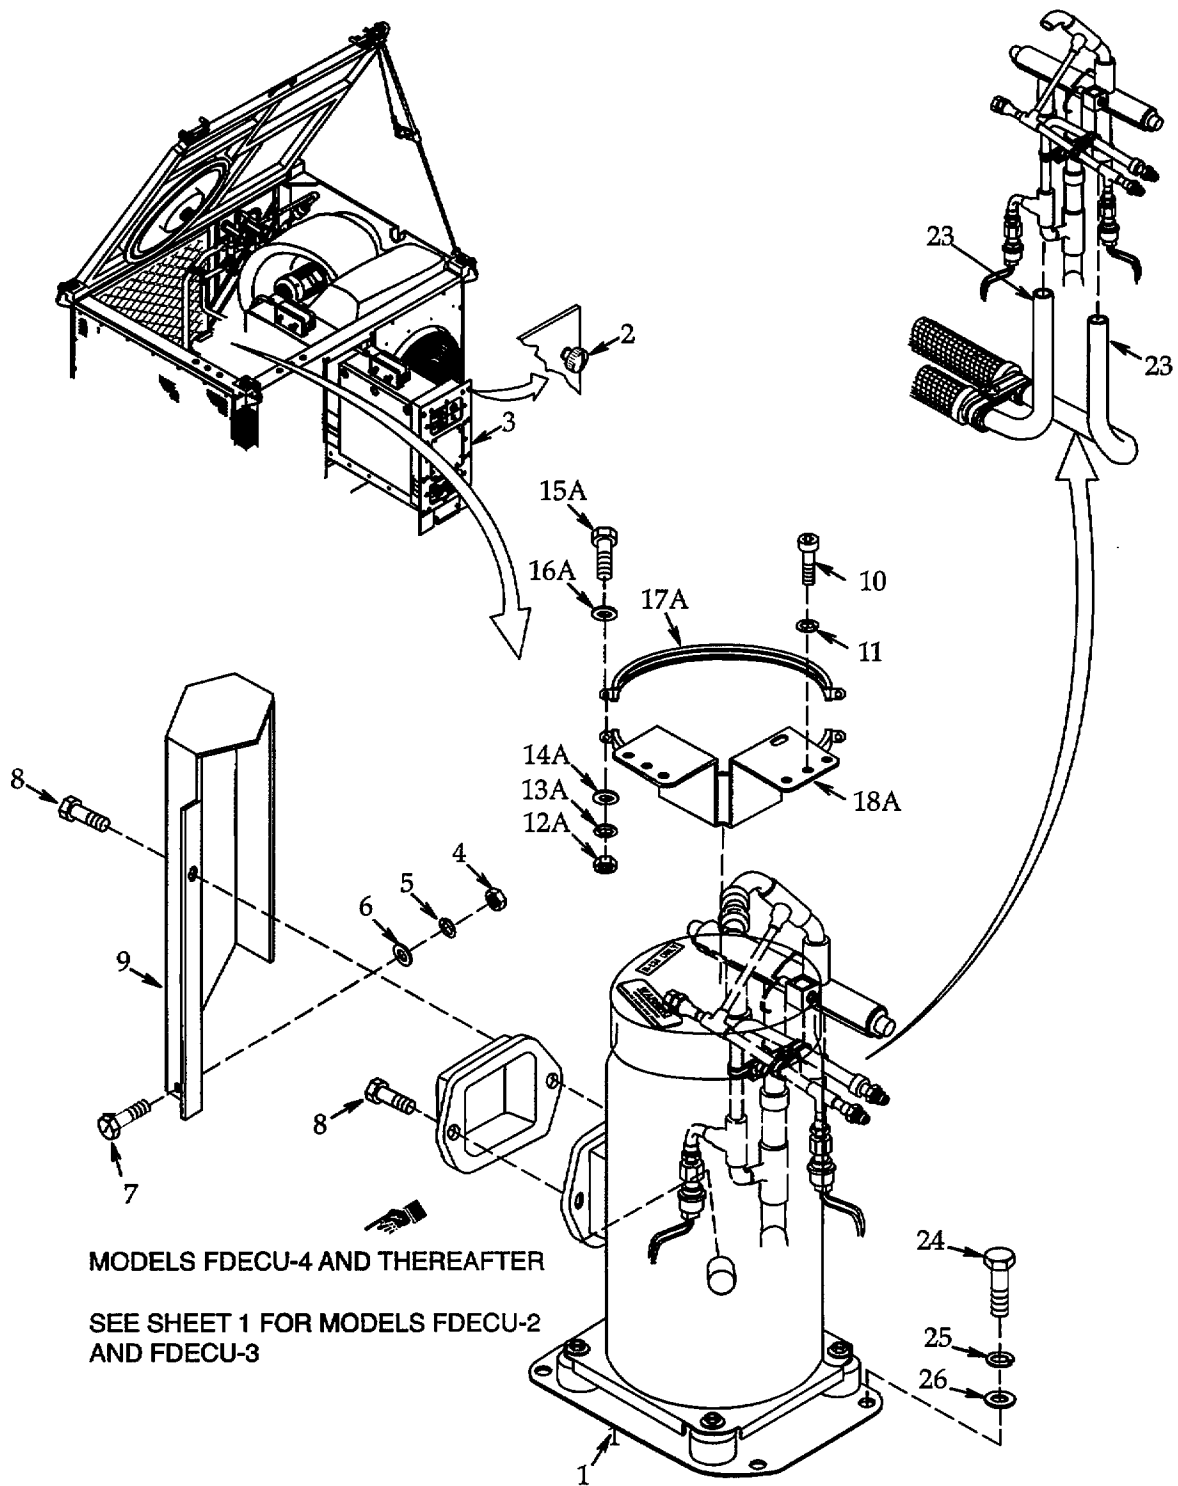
Compressor and Reversing Valve Assembly (Sheet 2 of 2).
